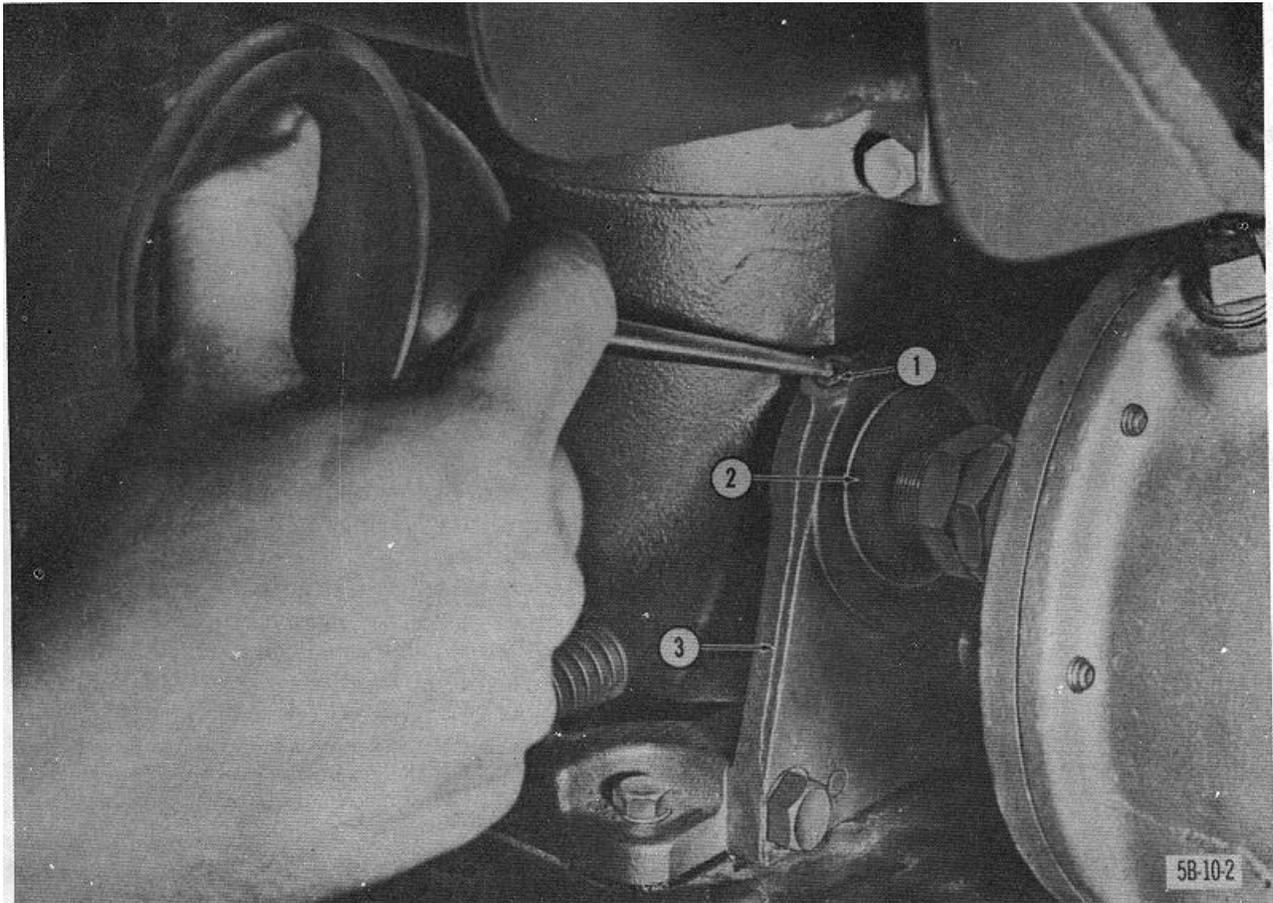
Lubricating working surfaces between support plates and trunnion through oil fitting.
